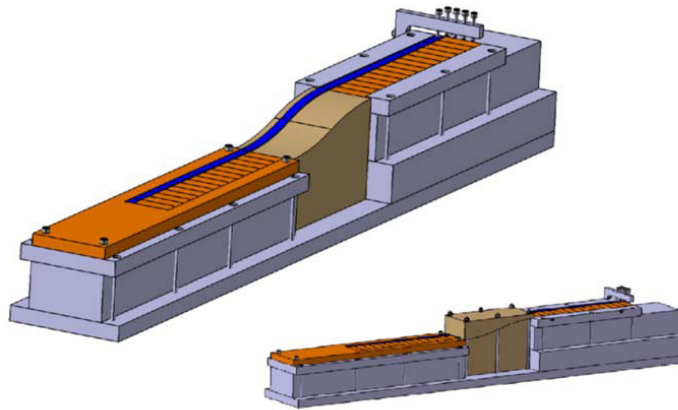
3D CAD model of the soldering device (left transformer side, right sample side).
